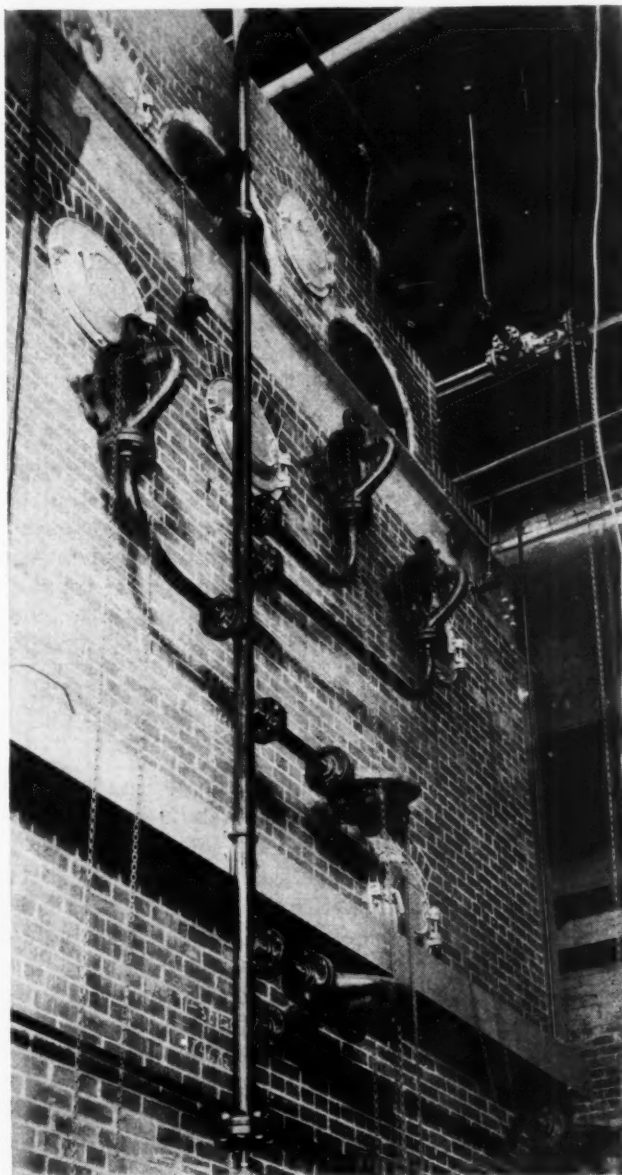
View of soot blower piping showing welded necks and long bends.
